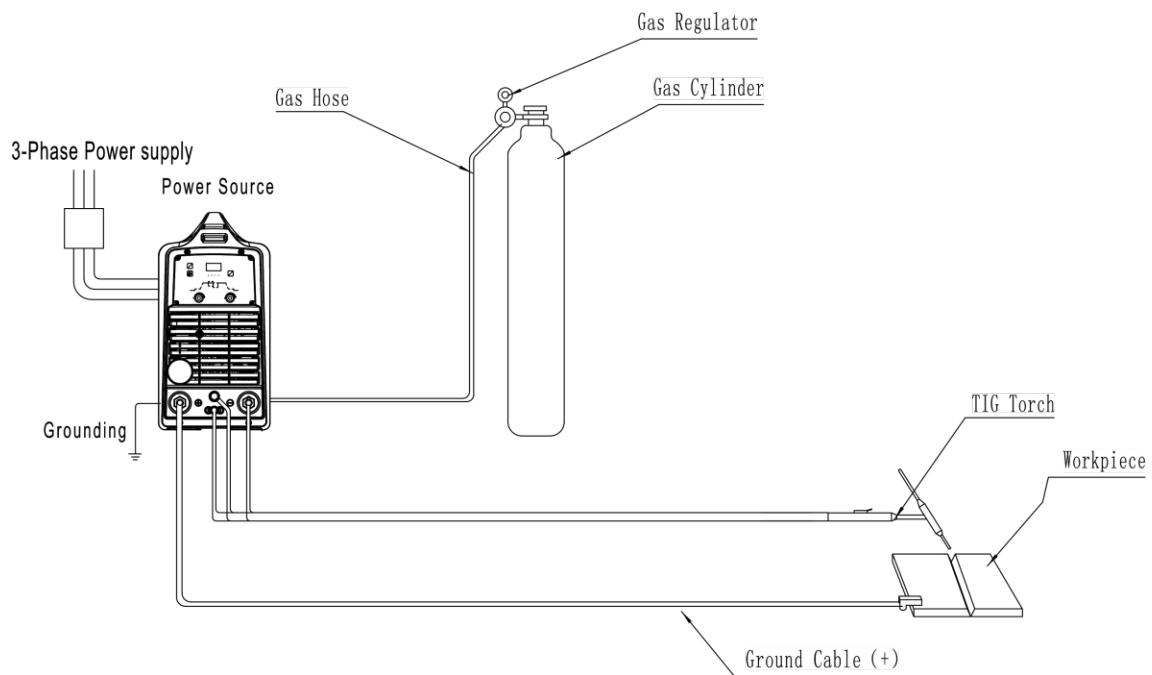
Connection and operation for TIG welding
